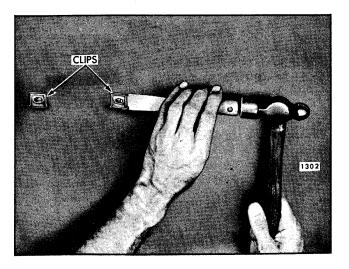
Removal of "Bath-Tub" Molding Clip
